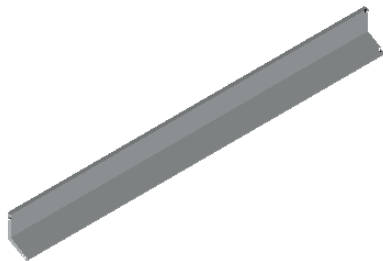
Aluminum longeron. The longerons connect the hexagonal panels and provide a mounting surface for side panels.
